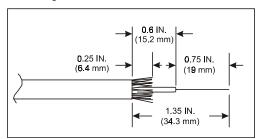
Recommended Dimensions for MiniCord[™] Cable and 9000 Series Cordage
